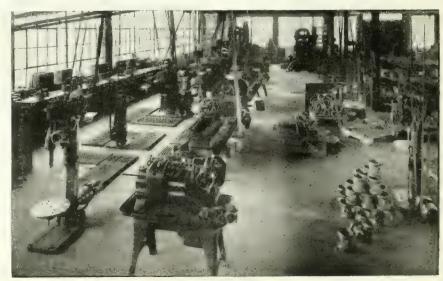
TOOL ROOM SHOWING SPACIOUS LOCATION OF MACHINES.
